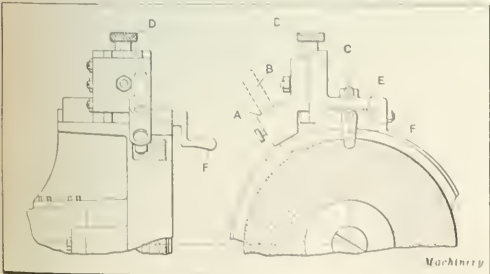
Wheel Truing Device used on Wilmarth & Morman Surface Grinding Machines
